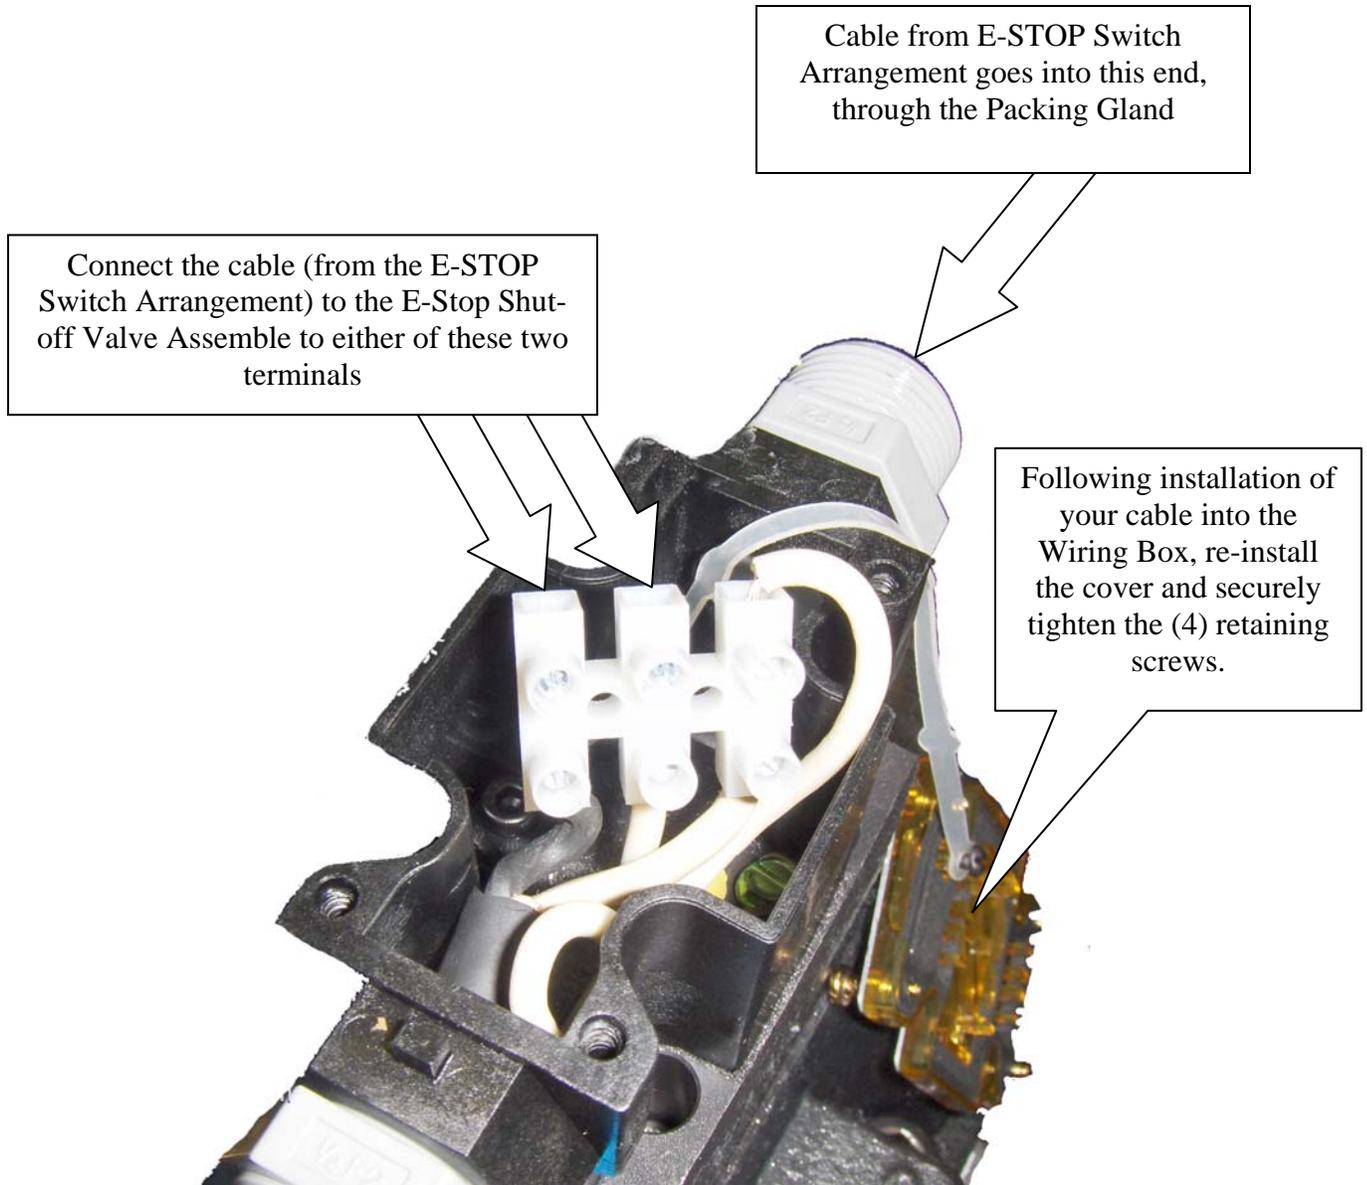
E-Stop Shut-off Valve Assembly-Wiring Box on top of Valve
